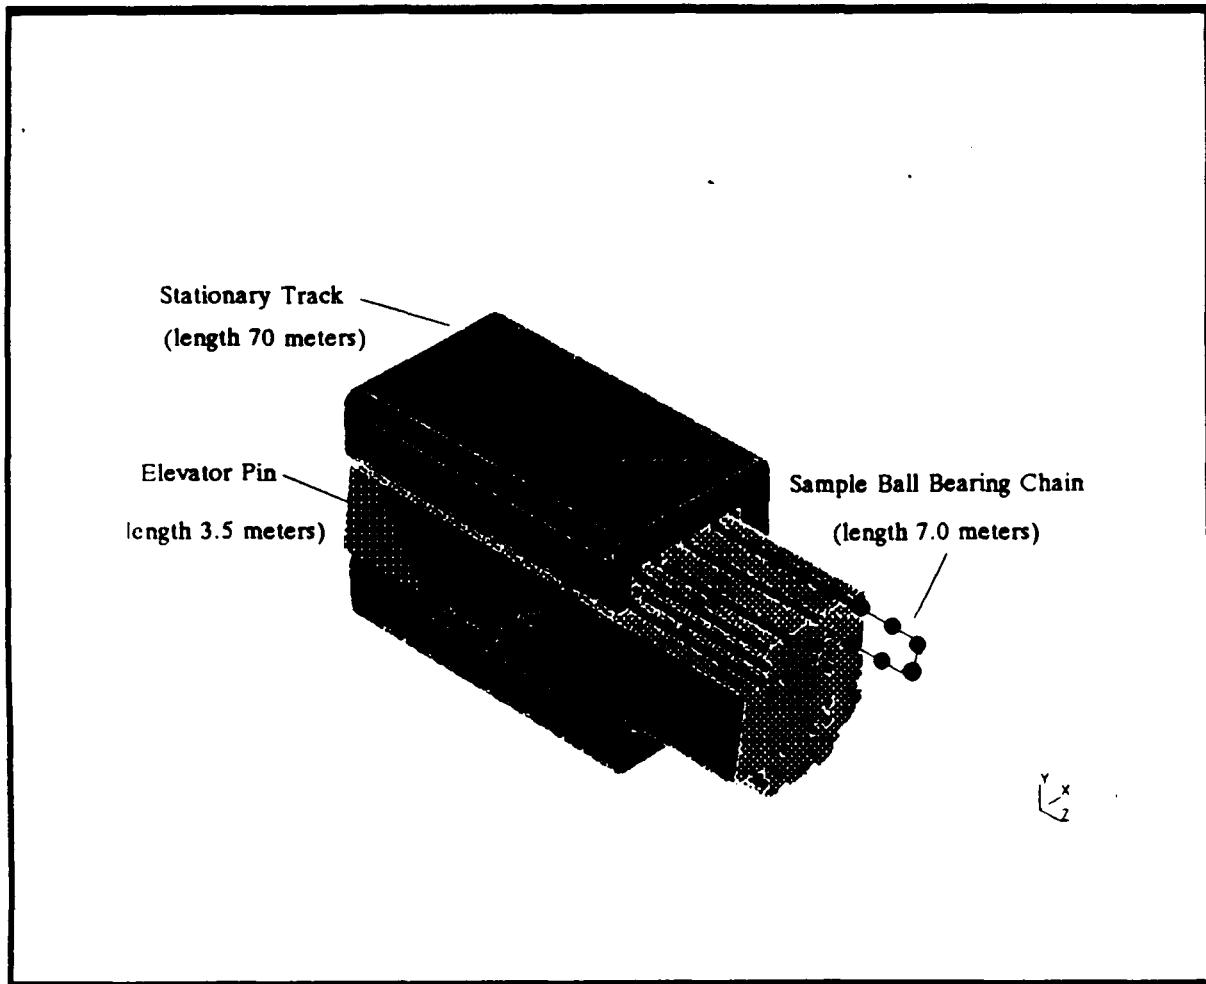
3-D View of Track and Pin with Ball Bearing Chain
